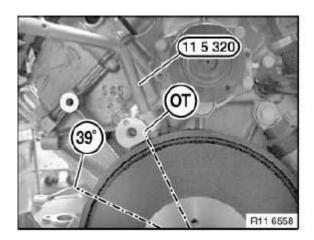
Identifying Special Tool 11 5 320 Courtesy of BMW OF NORTH AMERICA, INC.
